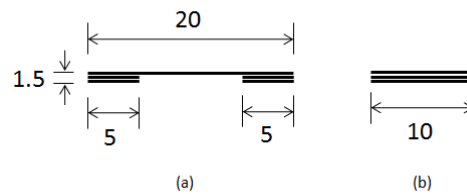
Receiver core dimensions. (a) Front view and (b) Side view. All dimensions in mm
